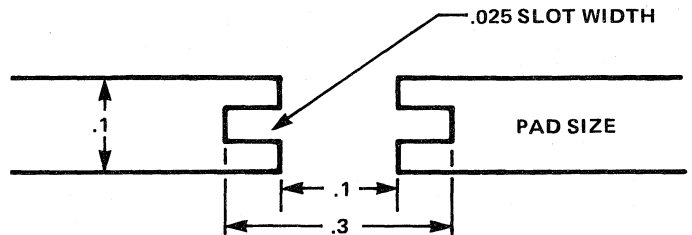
indicates the recommended mounting pad configuration for the SOT-23 package. Solder paste containing flux should be screened onto the pads to a thickness of 0.005 inches. The SOT-23 device is placed in position firmly adhering to the solder paste.
